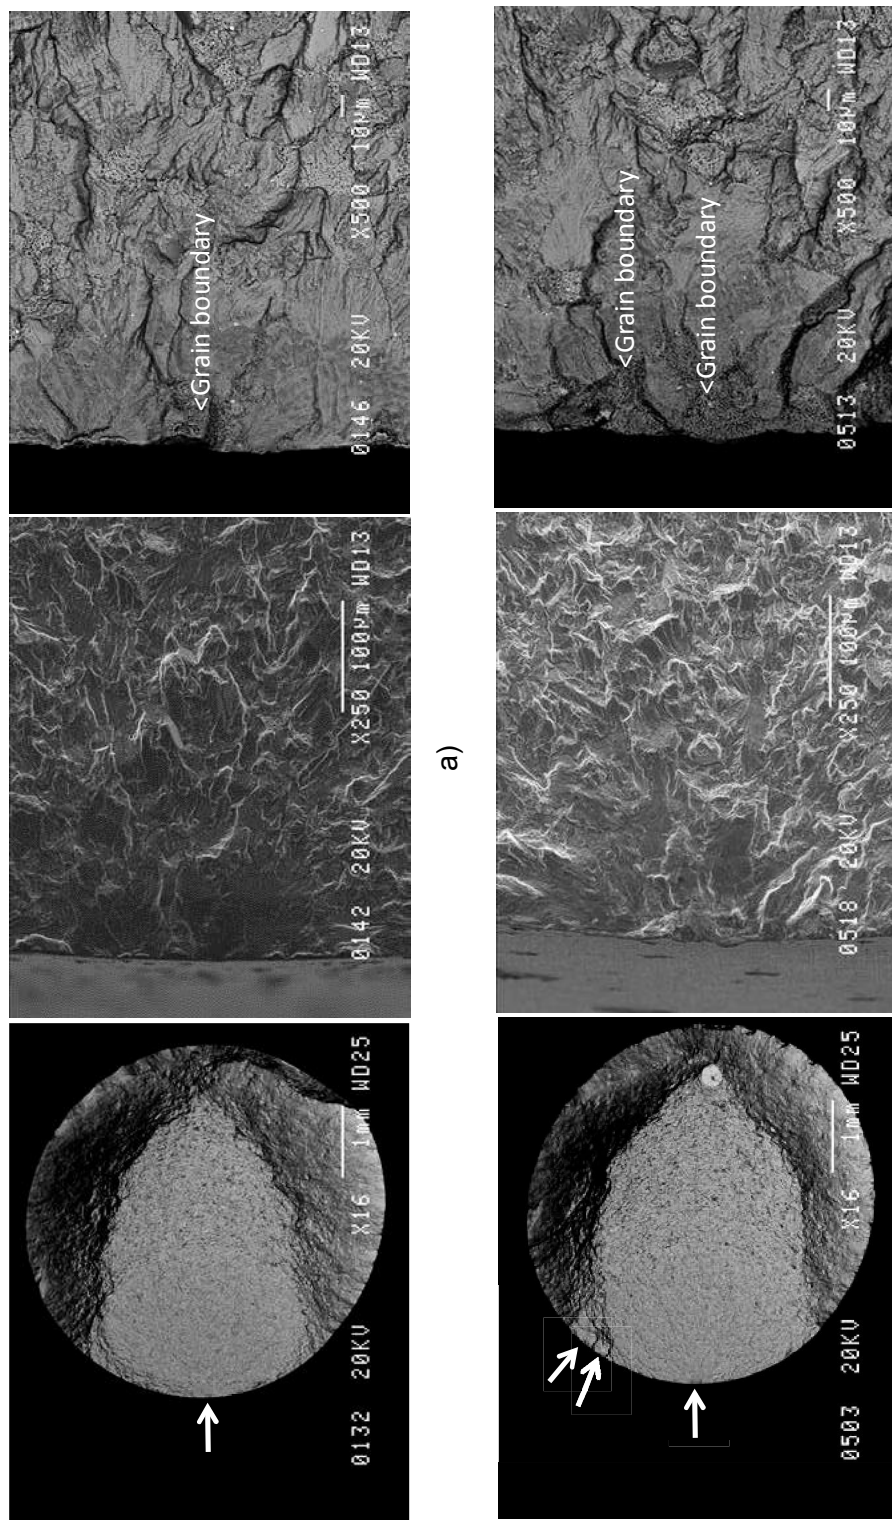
Typical fracture surfaces for LSHR group L specimens: a) T3-L2, 704 °C-440 h, 25,734 cycles; b) T3-L11, 760 °C-440 h, 43,119 cycles.
